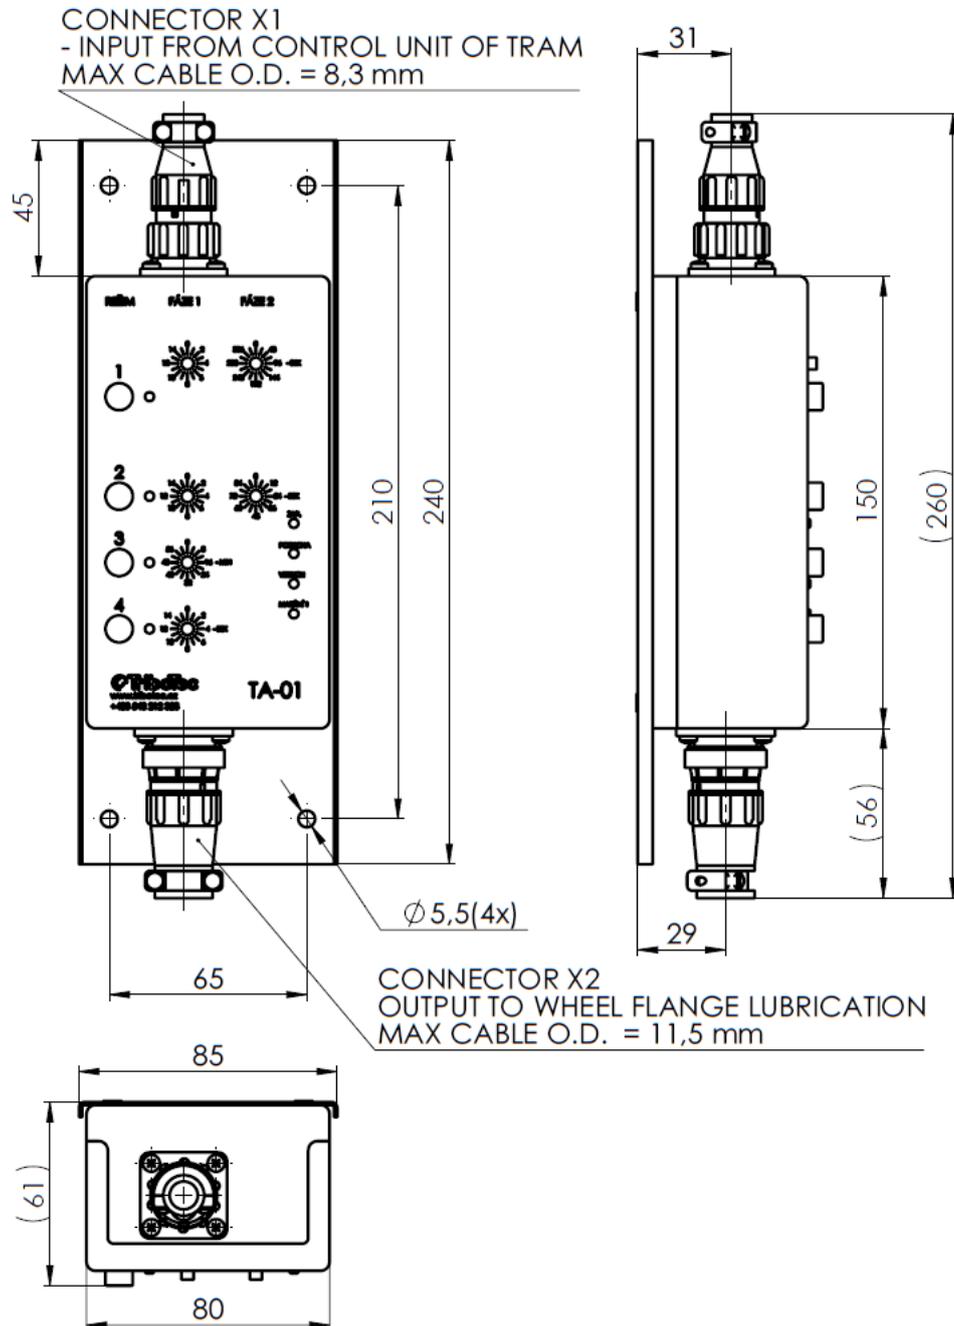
Dimensional drawing of Control Unit TA-01
